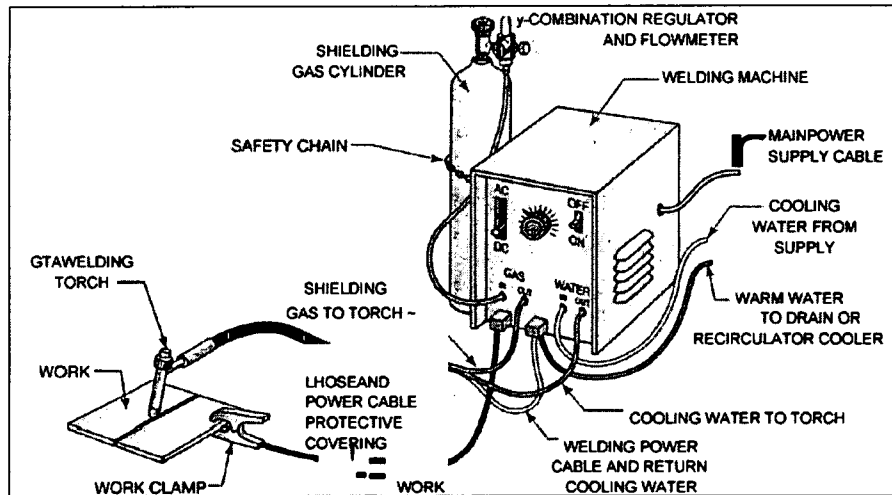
Gas Tungsten Arc Welding Equipment. [ 1 ]
